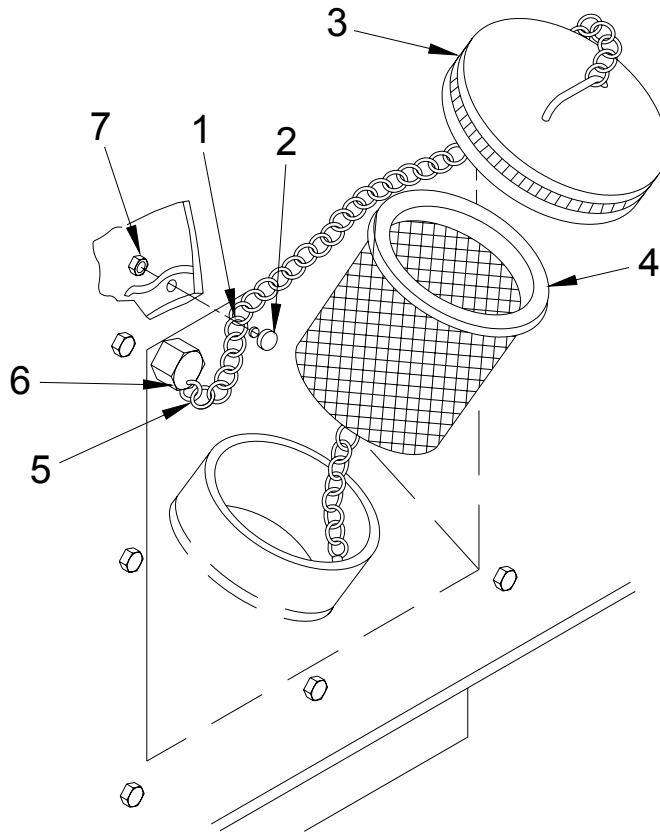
FUEL SYSTEM ASSEMBLY/FUEL TANK STRAINER ASSEMBLY
